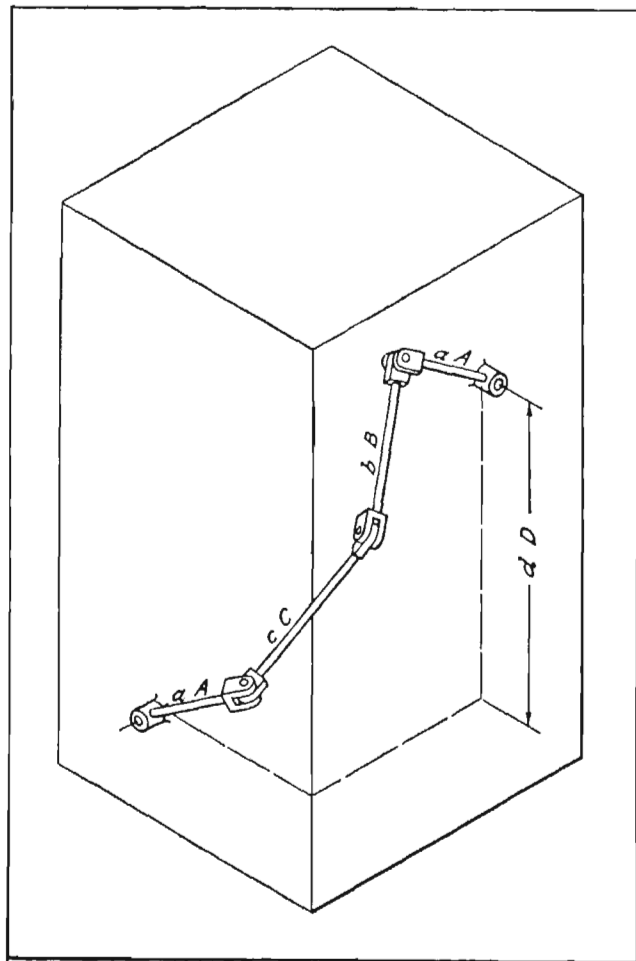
Space Linkage Mechanism for Transmitting Oscillating Motion.
